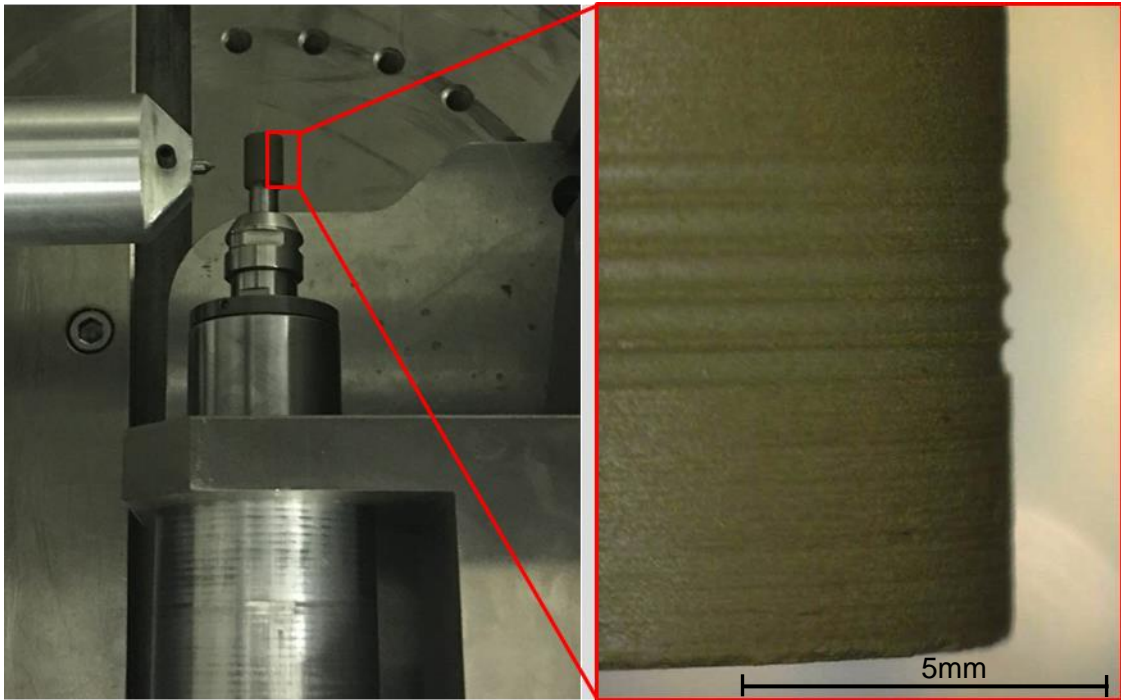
Grinding wheel post dressing with visible grooves highlighted
